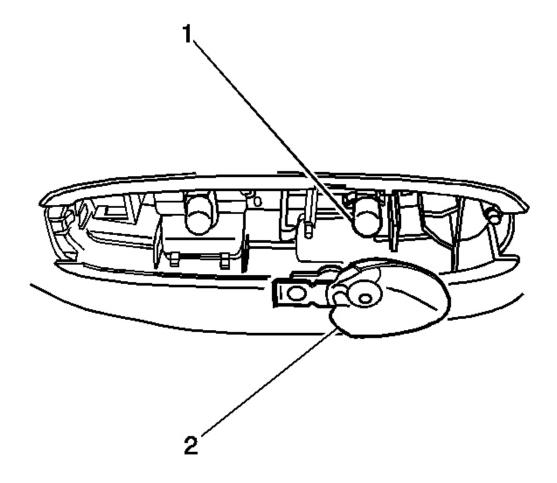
Identifying Reading Lamp Bulb & Reflector Courtesy of GENERAL MOTORS CORP.
